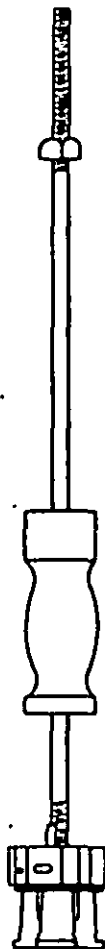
Type III, class 3, puller, mechanical, slide hammer, bearing race, three-jaw, internal.
